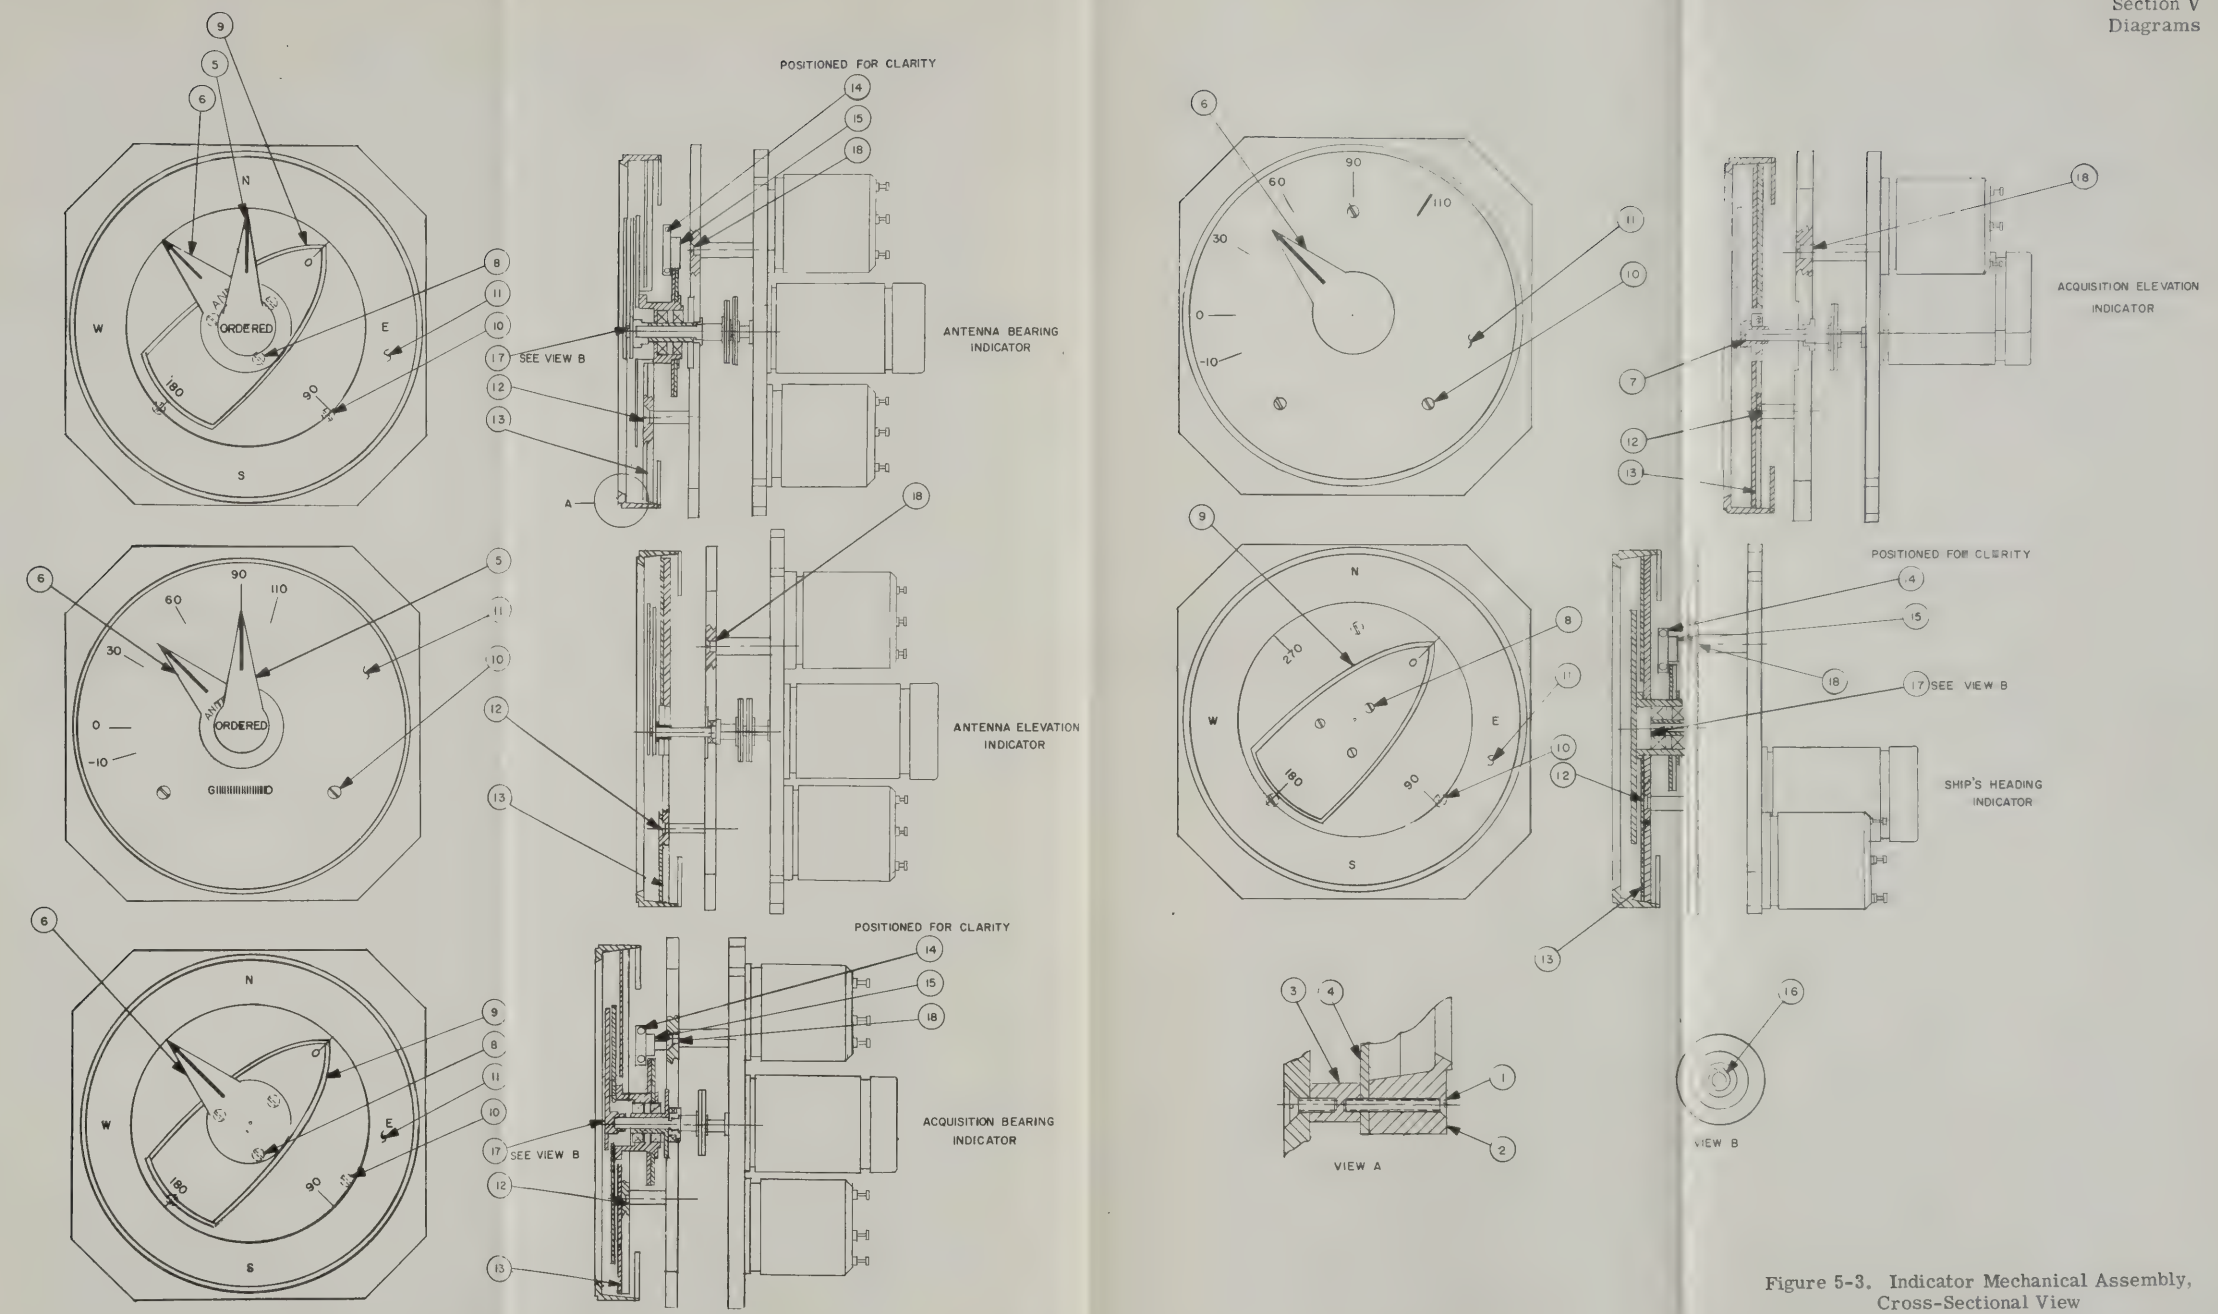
Indicator Mechanical Assembly, Cross-Sectional View
